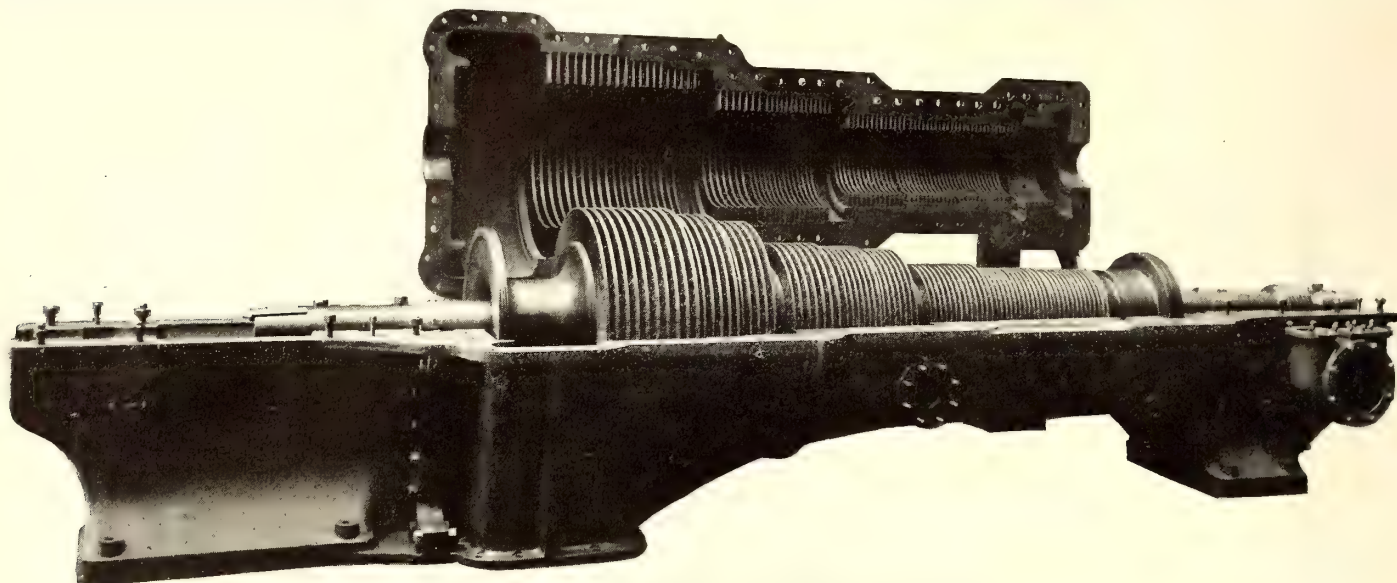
VIEW OF 5000-KW TURBINE OPENED UP
